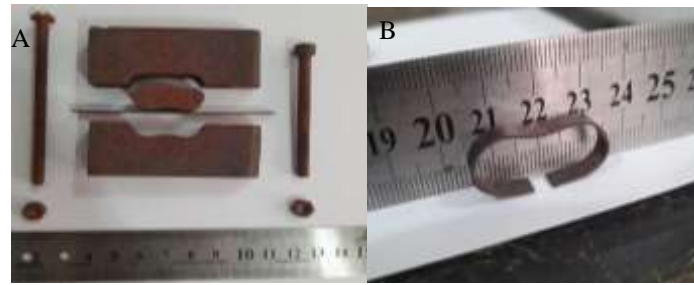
(A) Carbon steel mold, (B) C-shaped bending spring
